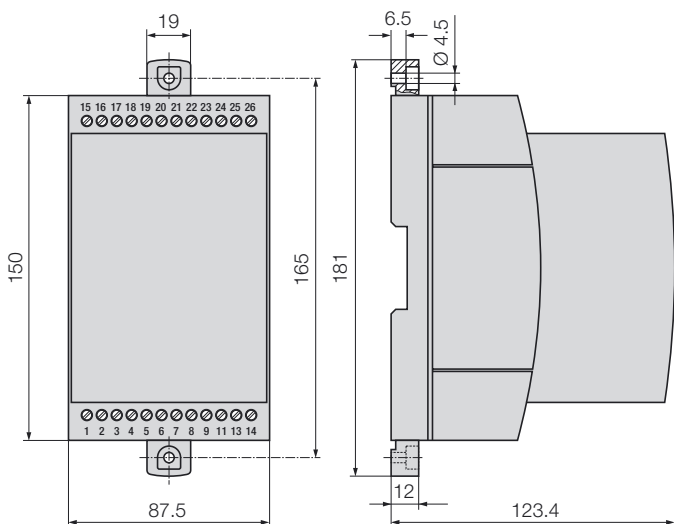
SINEAX DME 440 in housing T24, screw hole mounting brackets pulled out.
